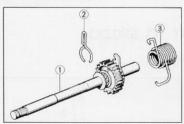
① Kick starter spindle ③ Kick starter spring (2) Ratchet spring
